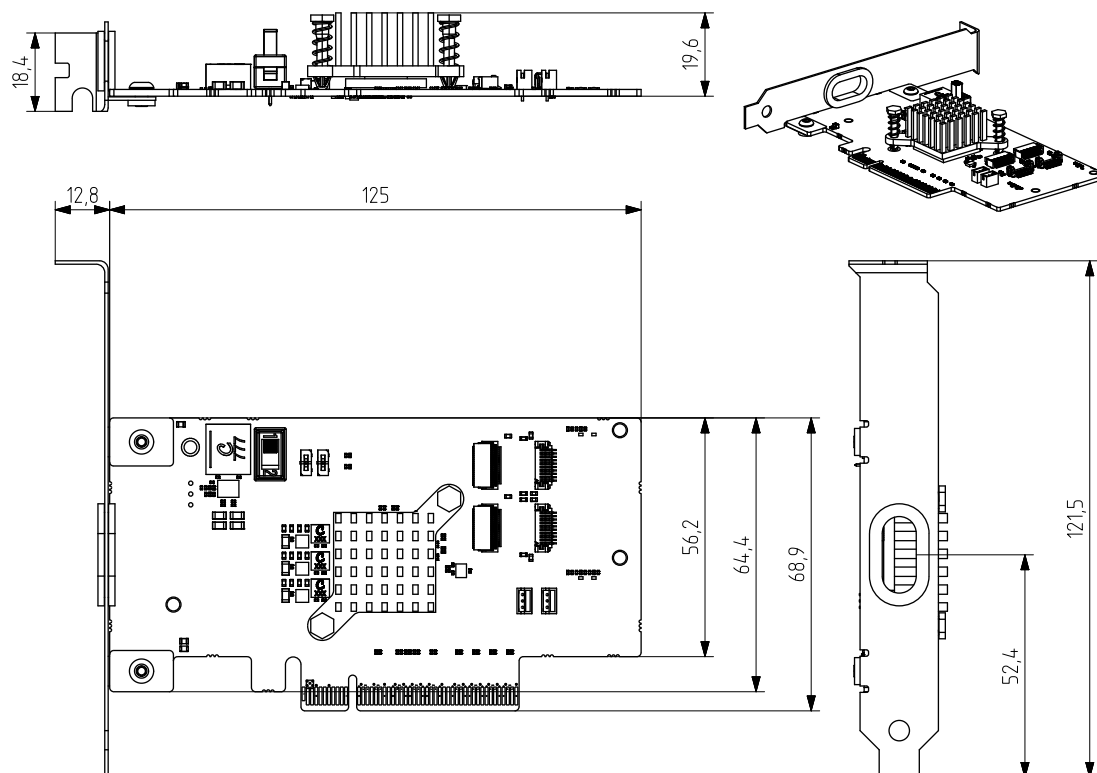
Dimensional drawing of HA-2P-X4G3-FF-X8G3 host adapters
